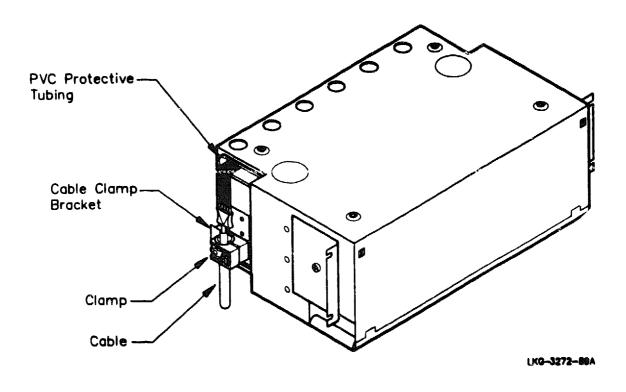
Outdoor Cable Installation (Bottom Cable Entry)
